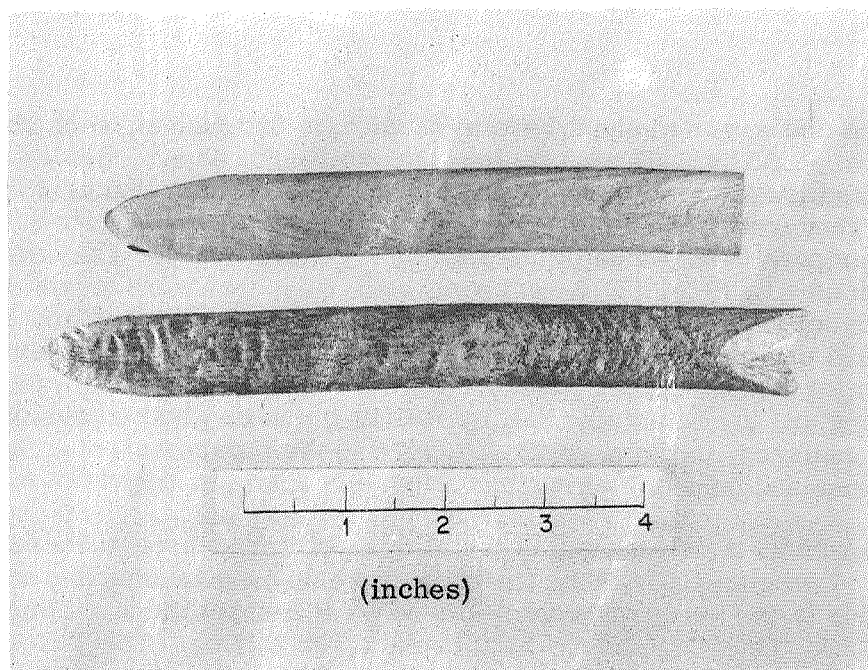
Surface Conditions of Extruded Sheet Bars After Removal of Sheath and Canning Materials. Top: Cr-2 at. % Hf sheet bar, sheathed in molybdenum and extruded in mild steel can. Forward end of extrusion is cropped. Bottom: Cr-2 at. % Ti sheet bar sheathed in mild steel and extruded in molybdenum can.
